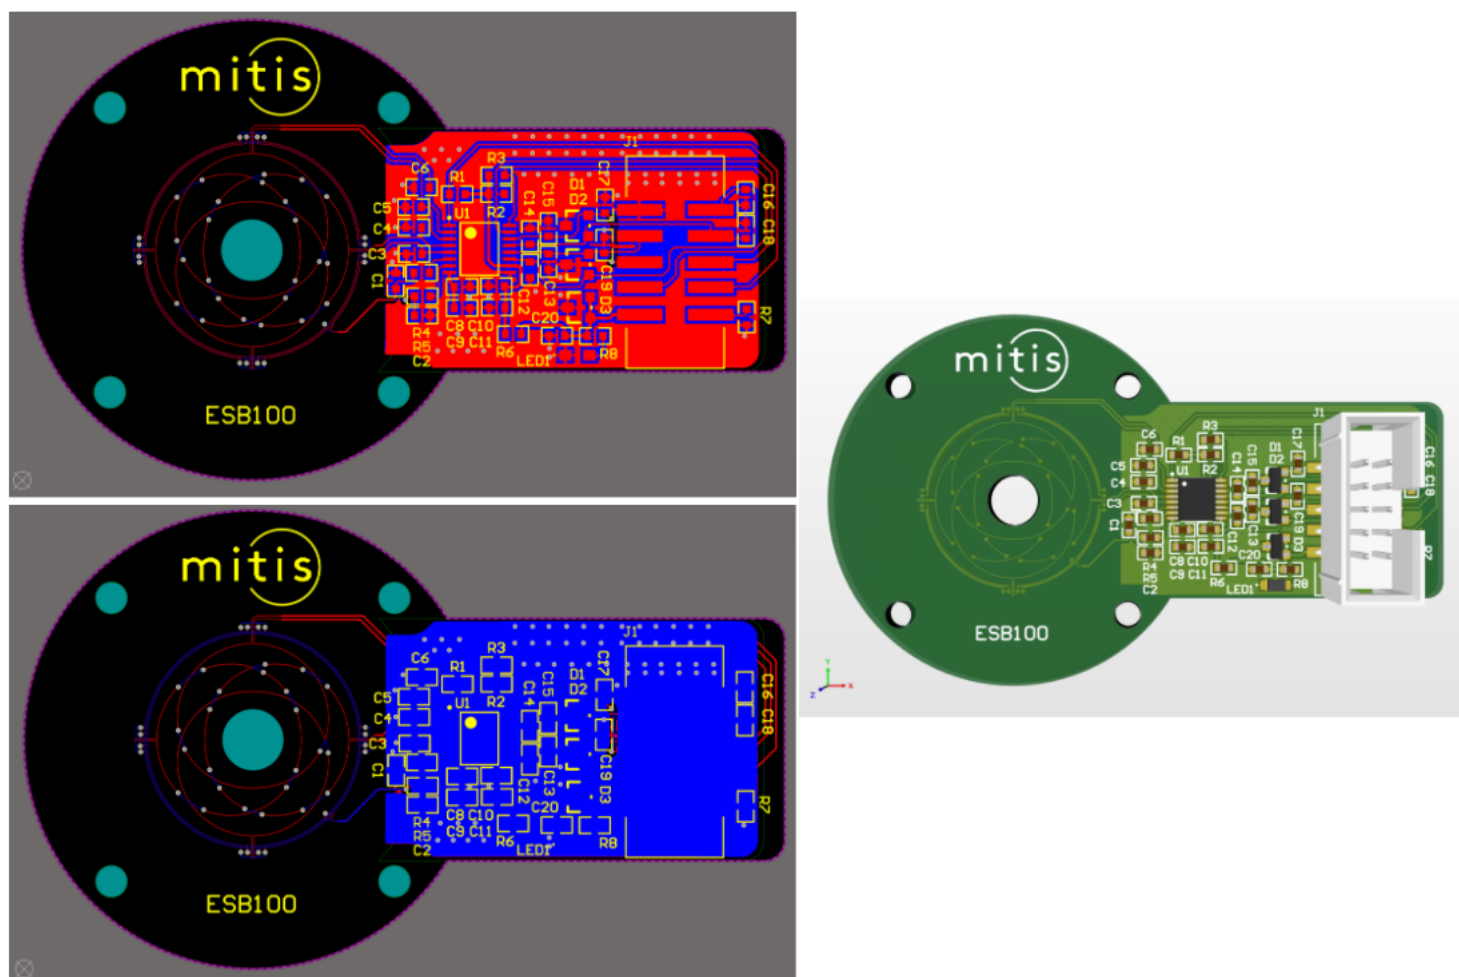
PCB design. Top left corner : Top layer, bottom left corner : Bottom layer, right : 3D view
